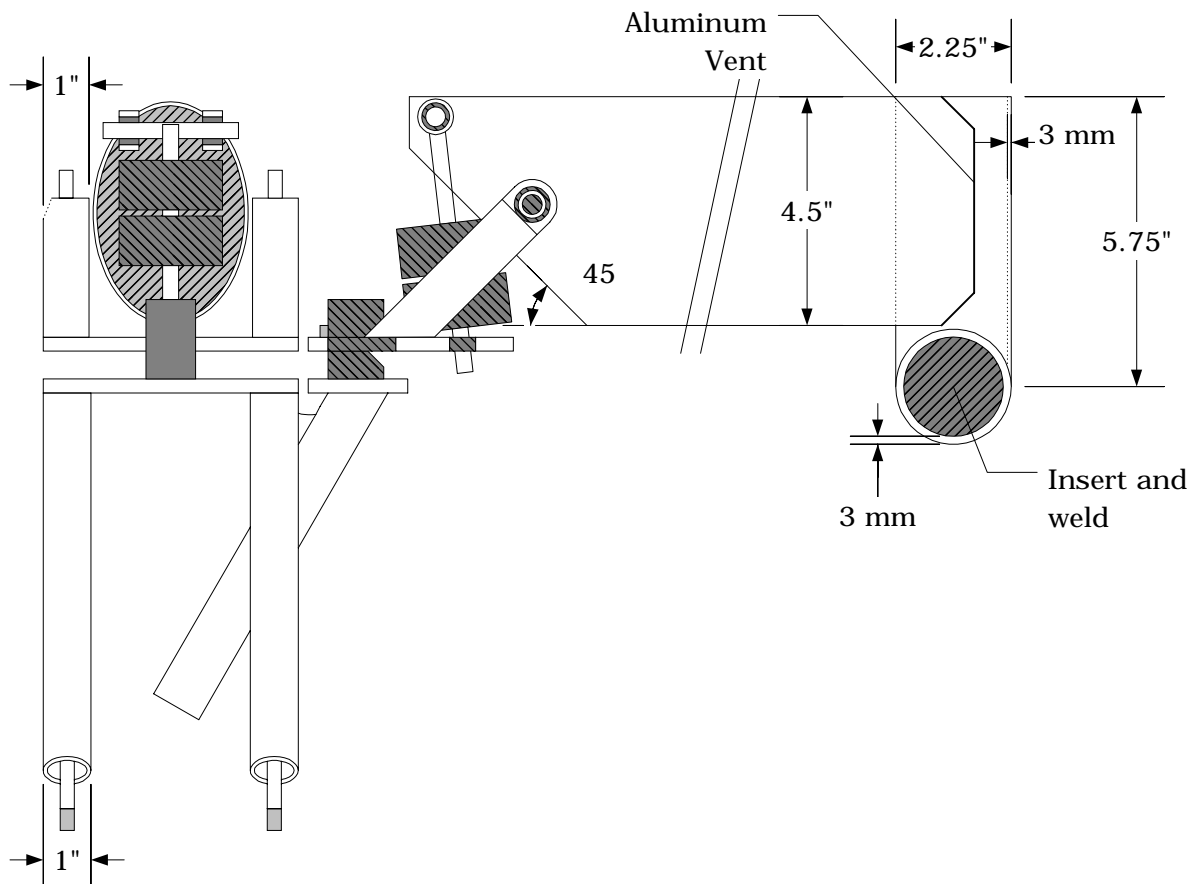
Rear View and Side View of the Main Frame and Attachments.
